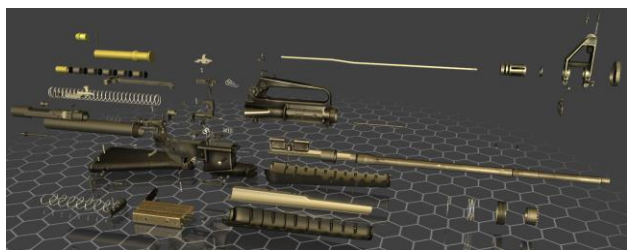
Screen capture from the WoG of the Colt M16 A1 completely disassembled as required by the assignment. This firearm is comprised of 156 parts.
